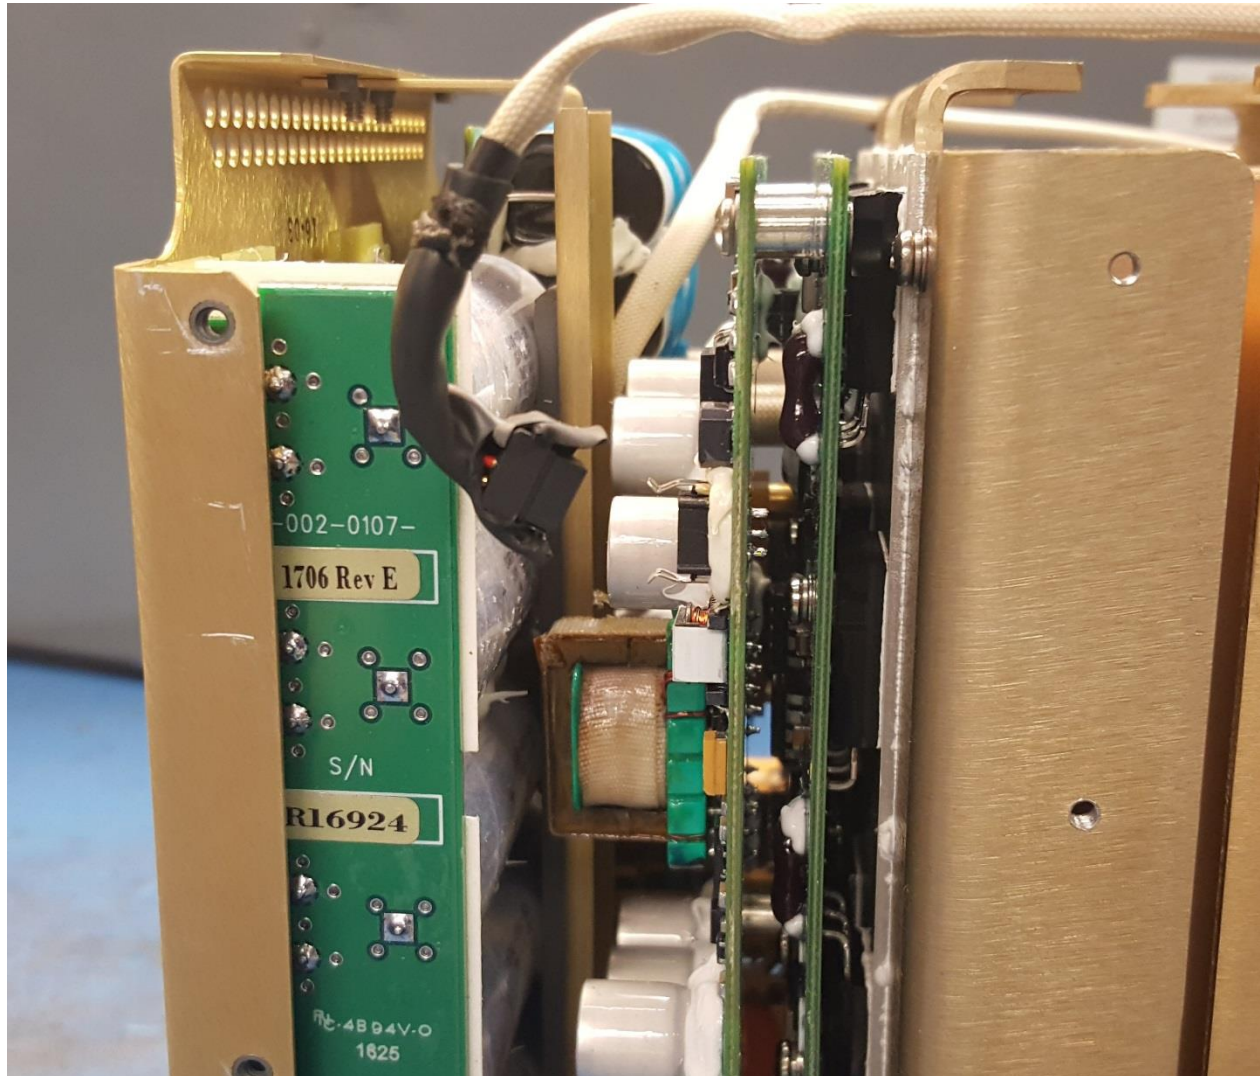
Bus Assembly Screw, Connector, and Cable Tie Locations
